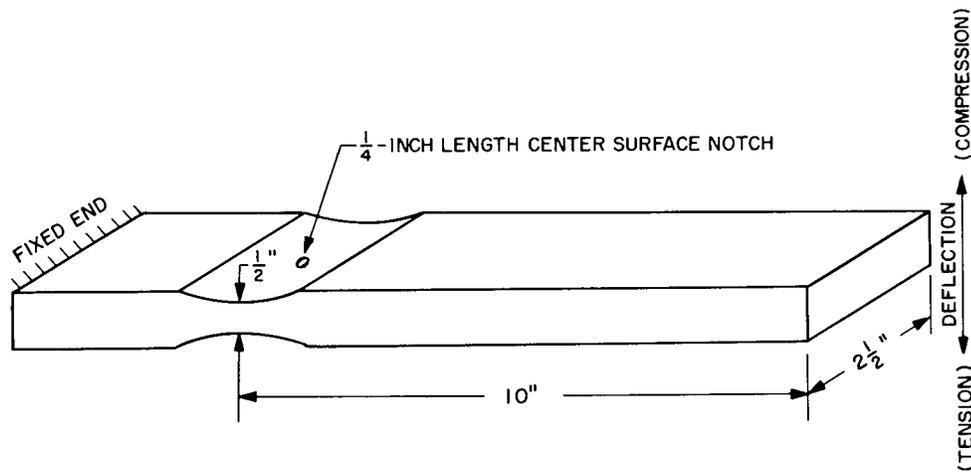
Illustration of Lehigh plate-bend fatigue specimen
